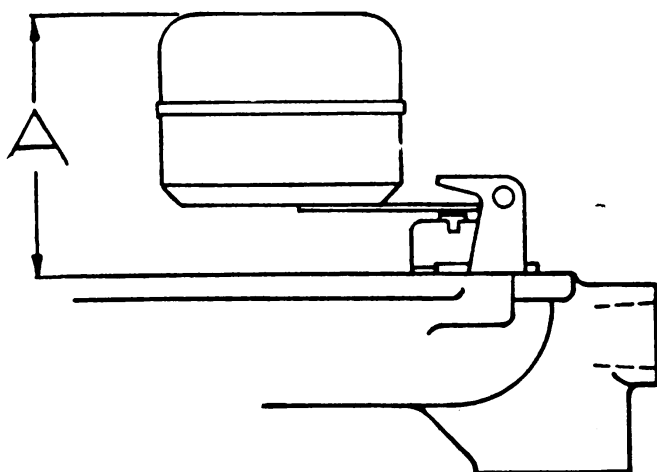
Diagram Showing Measurement of Carburetor Float Level. Measurement A Should be $1\frac{1}{2}$ Inch Plus or Minus $\frac{3}{64}$ Inch
